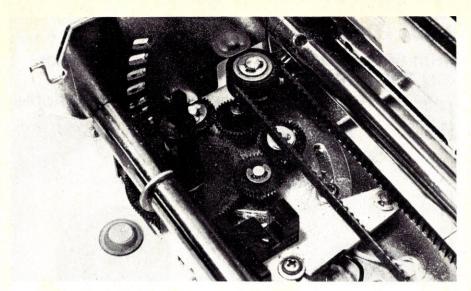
The ribbon drive mechanism is a system of injection molded plastic gears. The head belt supplies power to the gear nearest the belt pulley. This gear flips between the two adjacent gears depending on which way the head is moving. The result is that the ribbon is driven regardless of the direction of head travel. The head home sensor is shown in the foreground of the gears. The ribbon gears and home sensor each have a single factory set adjustment. The prudent owner will not tamper with either setting.
